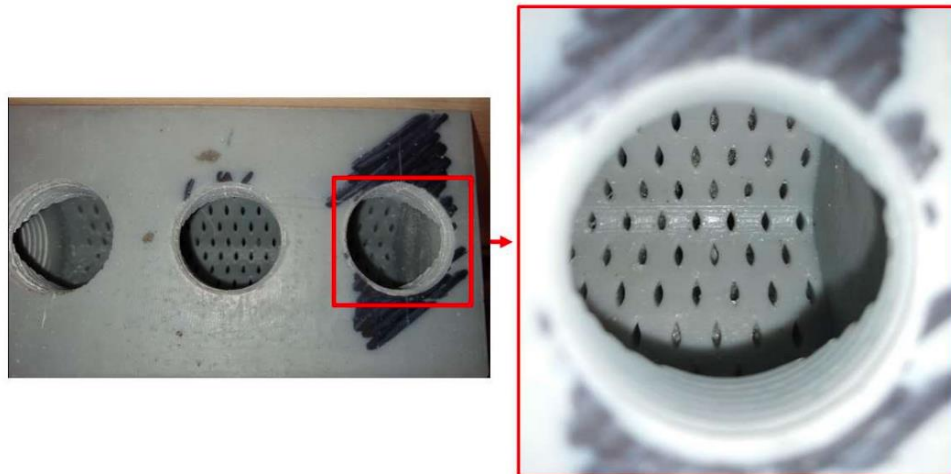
PNTHX1's Internal Tube Blockages with Support Material
